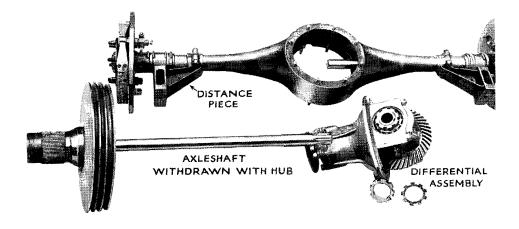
Illustration No. 67.—The rear axle, showing the differential assembly and crown wheel bolted in position.
